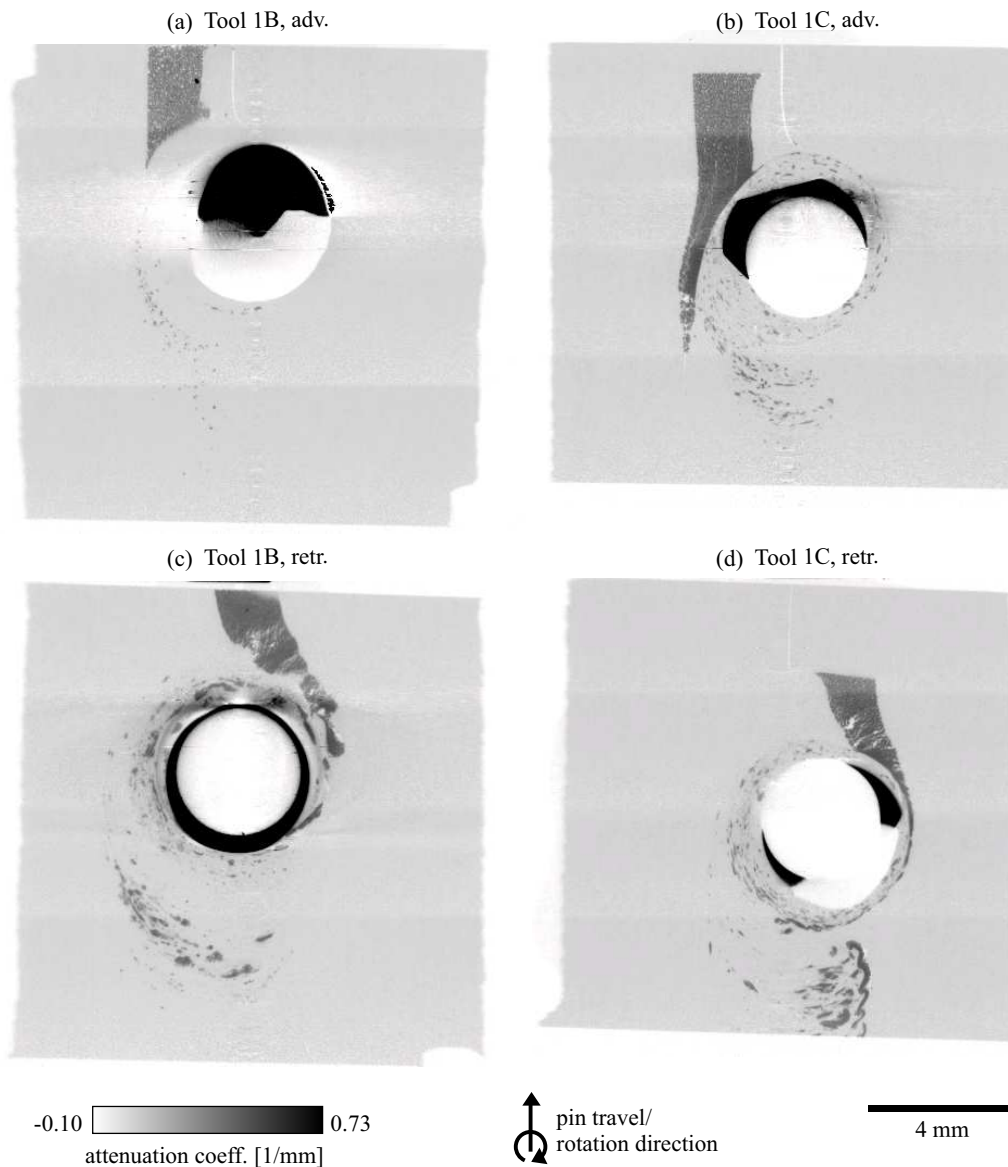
Tomographic cross sections from four FSW samples produced using the stop-action technique. The pin of the welding tool was spark eroded prior to examination. The remaining pin fragments (black), titanium powder (dark gray), and aluminum (light gray) are visible. Welding was conducted with titanium powder embedded on the advancing (adv.) and retreating (retr.) side for both tool 1B and tool 1C. The cross sections are oriented parallel to the tomographic rotation axis and were stacked from four scans each. A slight variation in photon energy caused by the bent Laue monochromator results in a slight variation of the attenuation coefficient as a function of height. The large remaining pin fragment in (a) causes artifacts around the pin.
